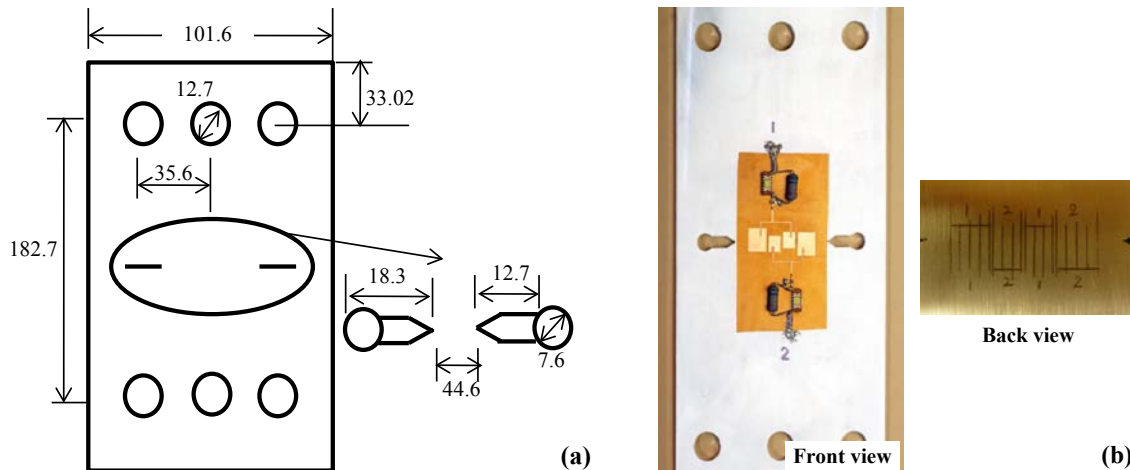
MSD fatigue specimen: (a) specimen dimensions; (b) specimen with sensors installed.
